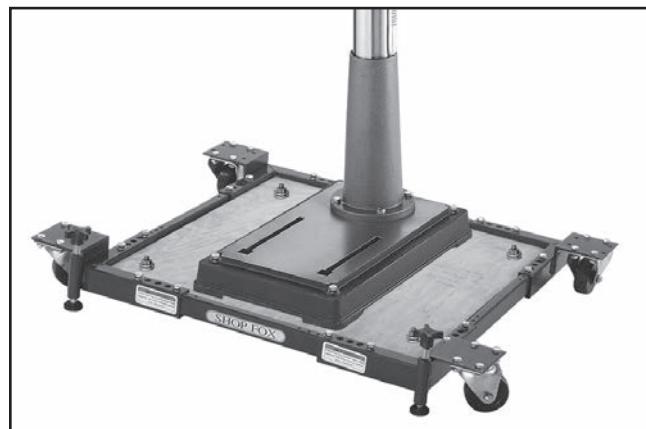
Drill press mounted on mobile base, using a base plate for support.
